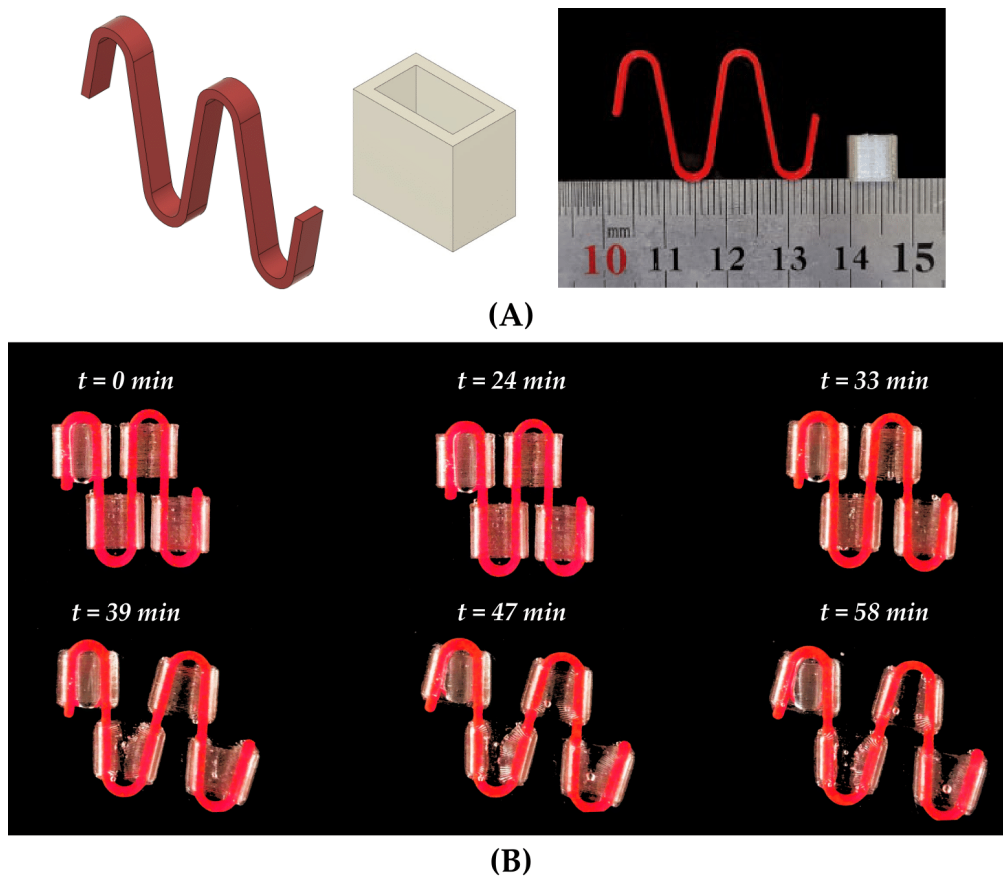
(A) CAD models & prototypes and (B) shape-morphing test for actuator 5.
